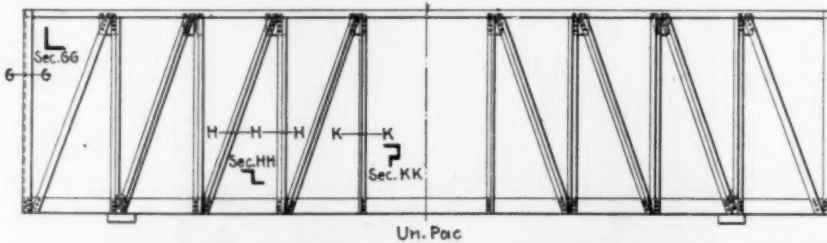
STEEL FRAMING USED ON THE UN. PAC. CARS HAVING NINE PANELS WITH END PANEL BRACED DIAGONALLY; SIDE DOOR POSTS PRESSED STEEL SECTION AND ANGLE IRON
